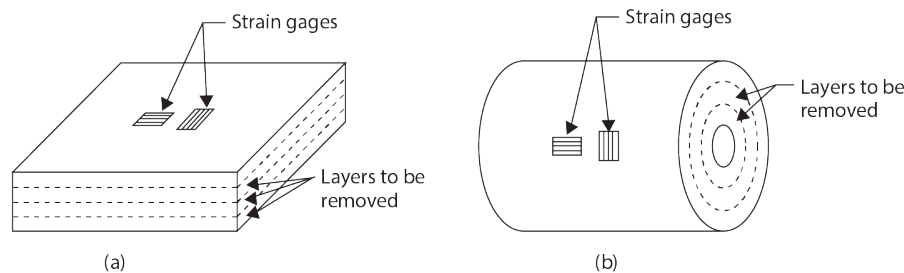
The Layer Removal Method for a flat (a) and cylindrical (b) section. [26]
